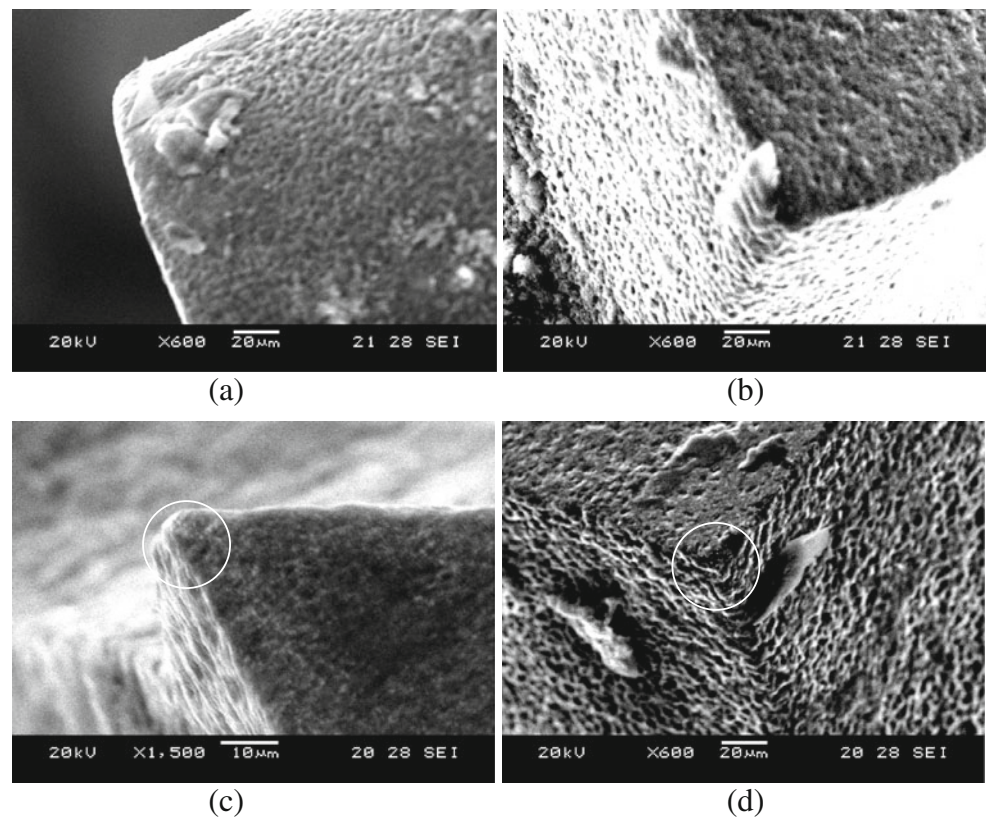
SEM image of tool after machining a circular, b D-shaped, c triangular, and d square tool
